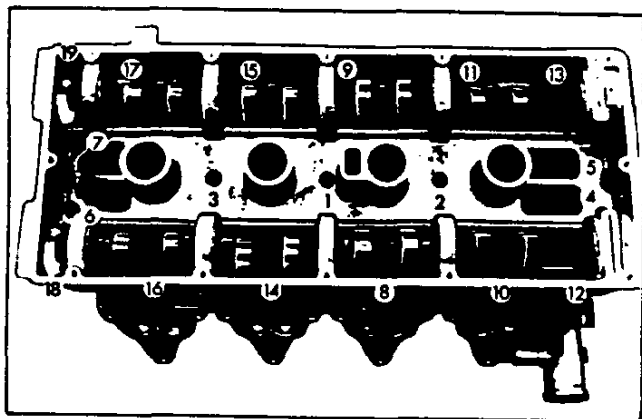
Camshaft Carrier Bolt Torque Sequence
